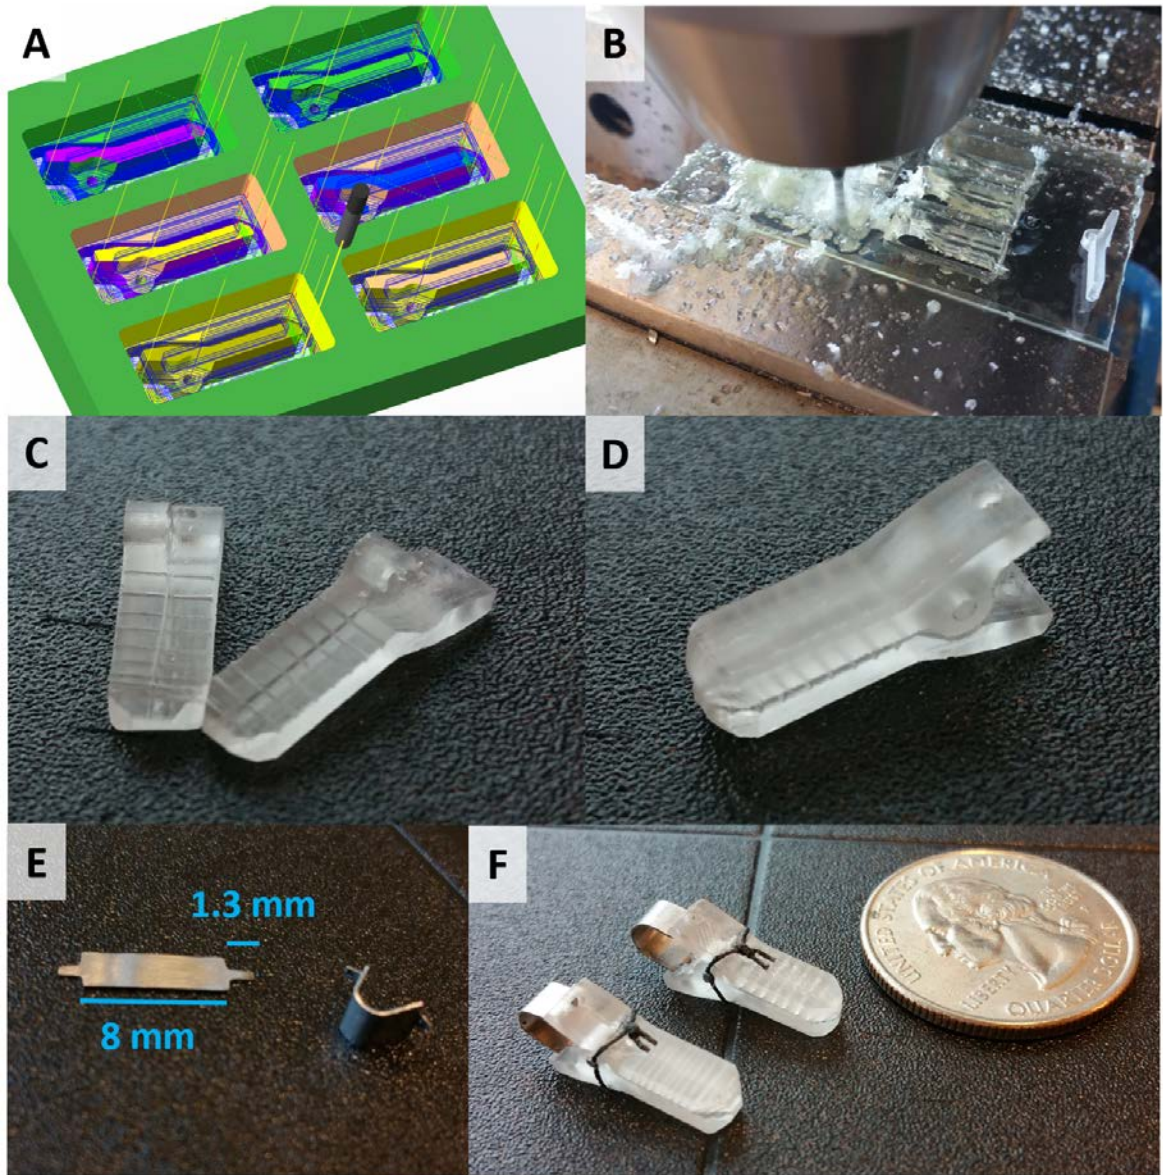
Custom edge-to-edge clip (GTclip) fabrication and assembly. Tool paths for CNC machining were designed in HSMworks for SolidWorks, and the GTclip grippers were machined from a single sheet of polycarbonate (A,B). The grippers were de-burred and a gripping pattern was cut into the gripping face with a razor blade (C,D). The spring element was cut from a spring tempered 0.008” thick 301 stainless steel strip using a rotary tool. The spring element is dimensioned as shown in (E). The final assembled GTclip devices are shown in (F).
